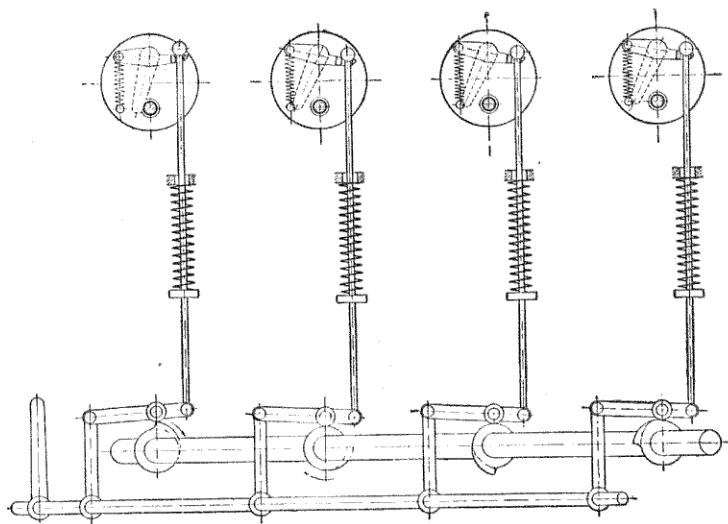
Adjustable contact-breaking device by Robert Bosch, for a four-cylinder automobile engine.
